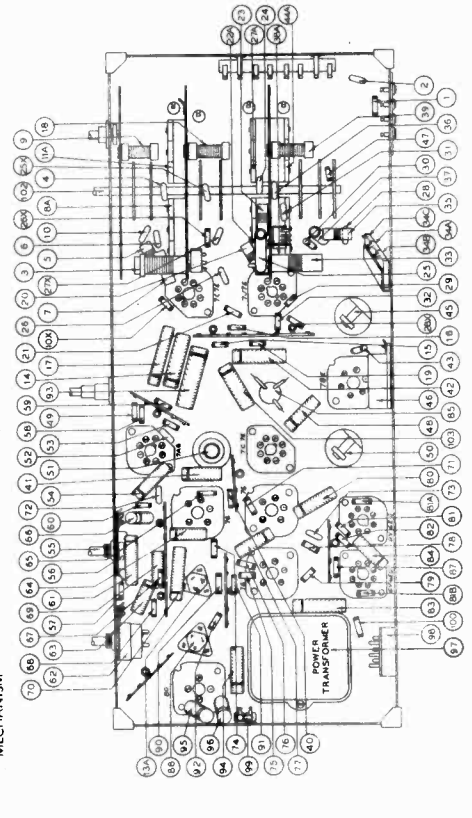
PART LOCATIONS, UNDERSIDE OF CHASSIS
